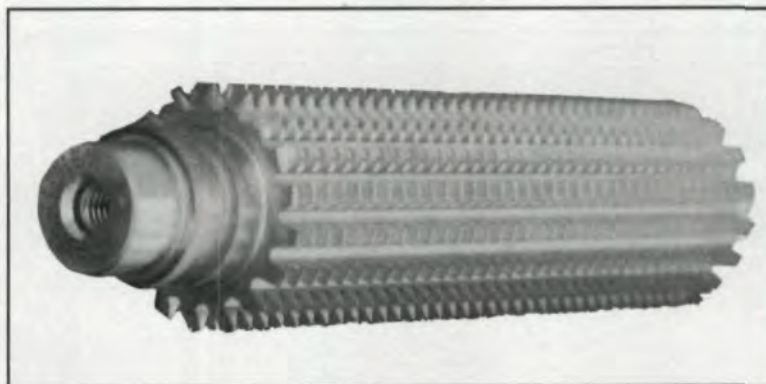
The Wafer™ hob offered by Pfauter-Maag Cutting Tools. (Courtesy Pfauter-Maag Cutting Tools.)
